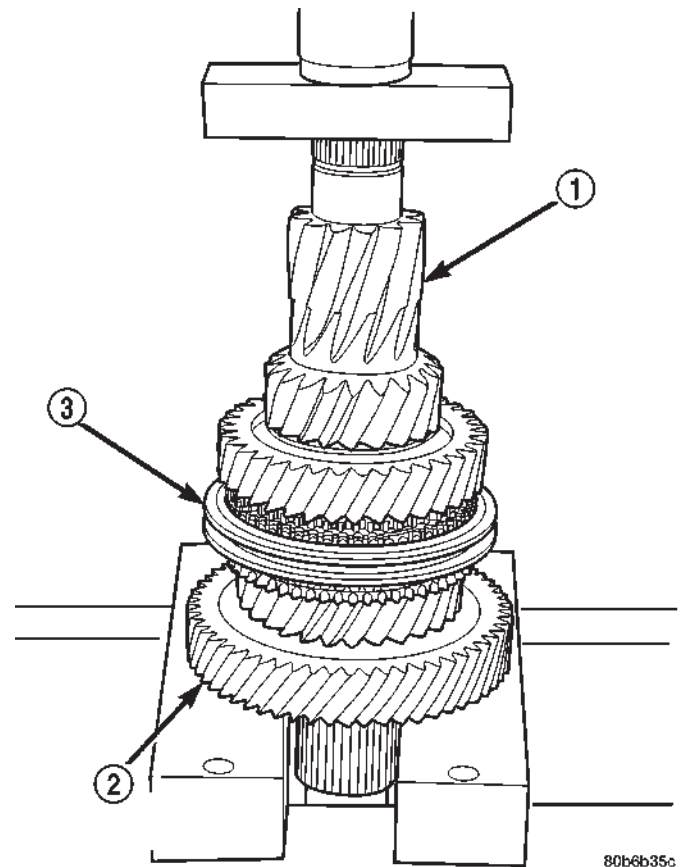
Fourth Countershaft onto Sixth Countershaft Gear
